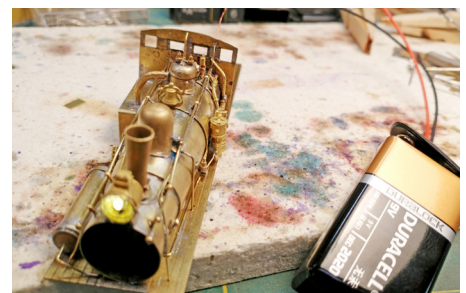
It worked! Just to be safe I also tested it with the decoder soldered in place and used alligator clips to attach the decoder's leads to my track. It still worked.
